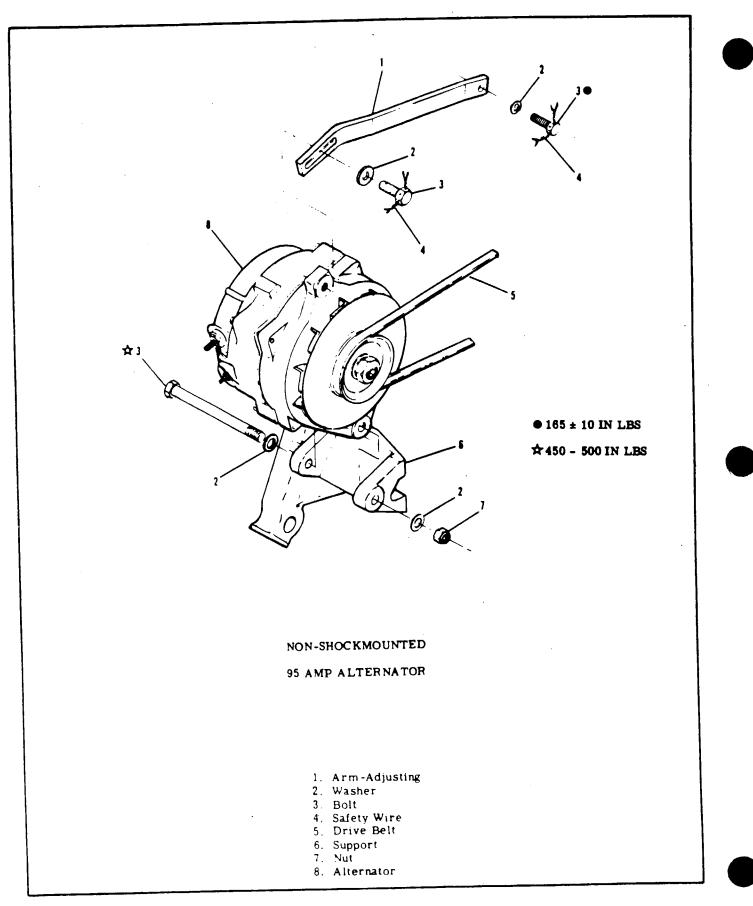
Alternator Installation (Sheet 3 of 3)
